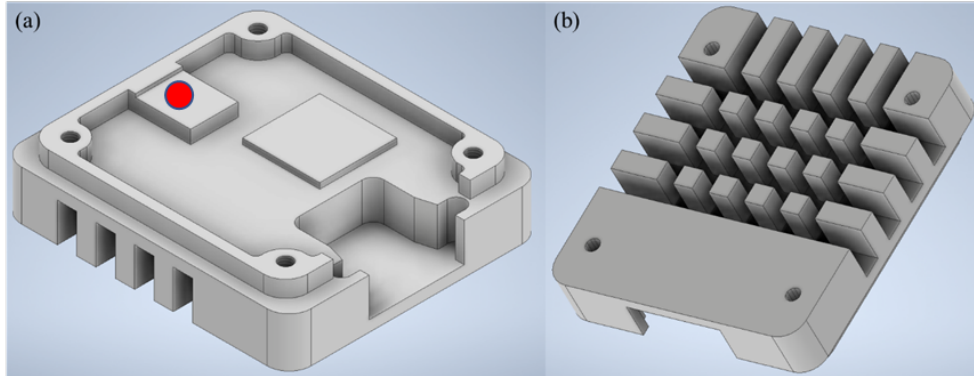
(a) Heatsink design schematic – front side (b) Heatsink design schematic – bottom side
